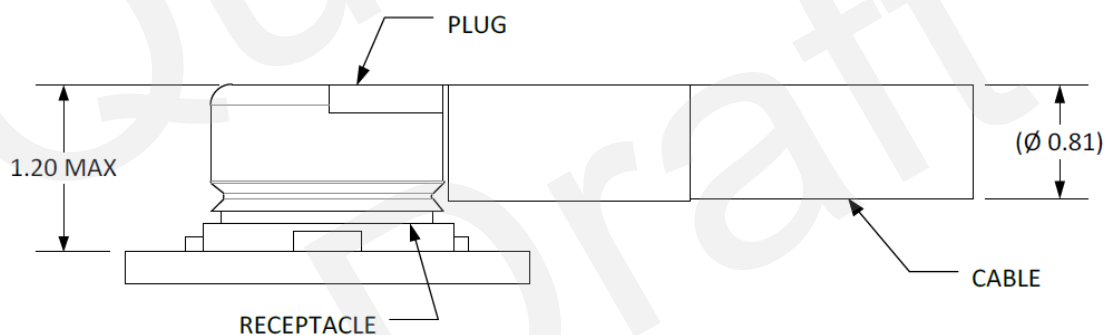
Connection between RF Connector and Mating Plug Using Ø0.81mm Coaxial Cable
